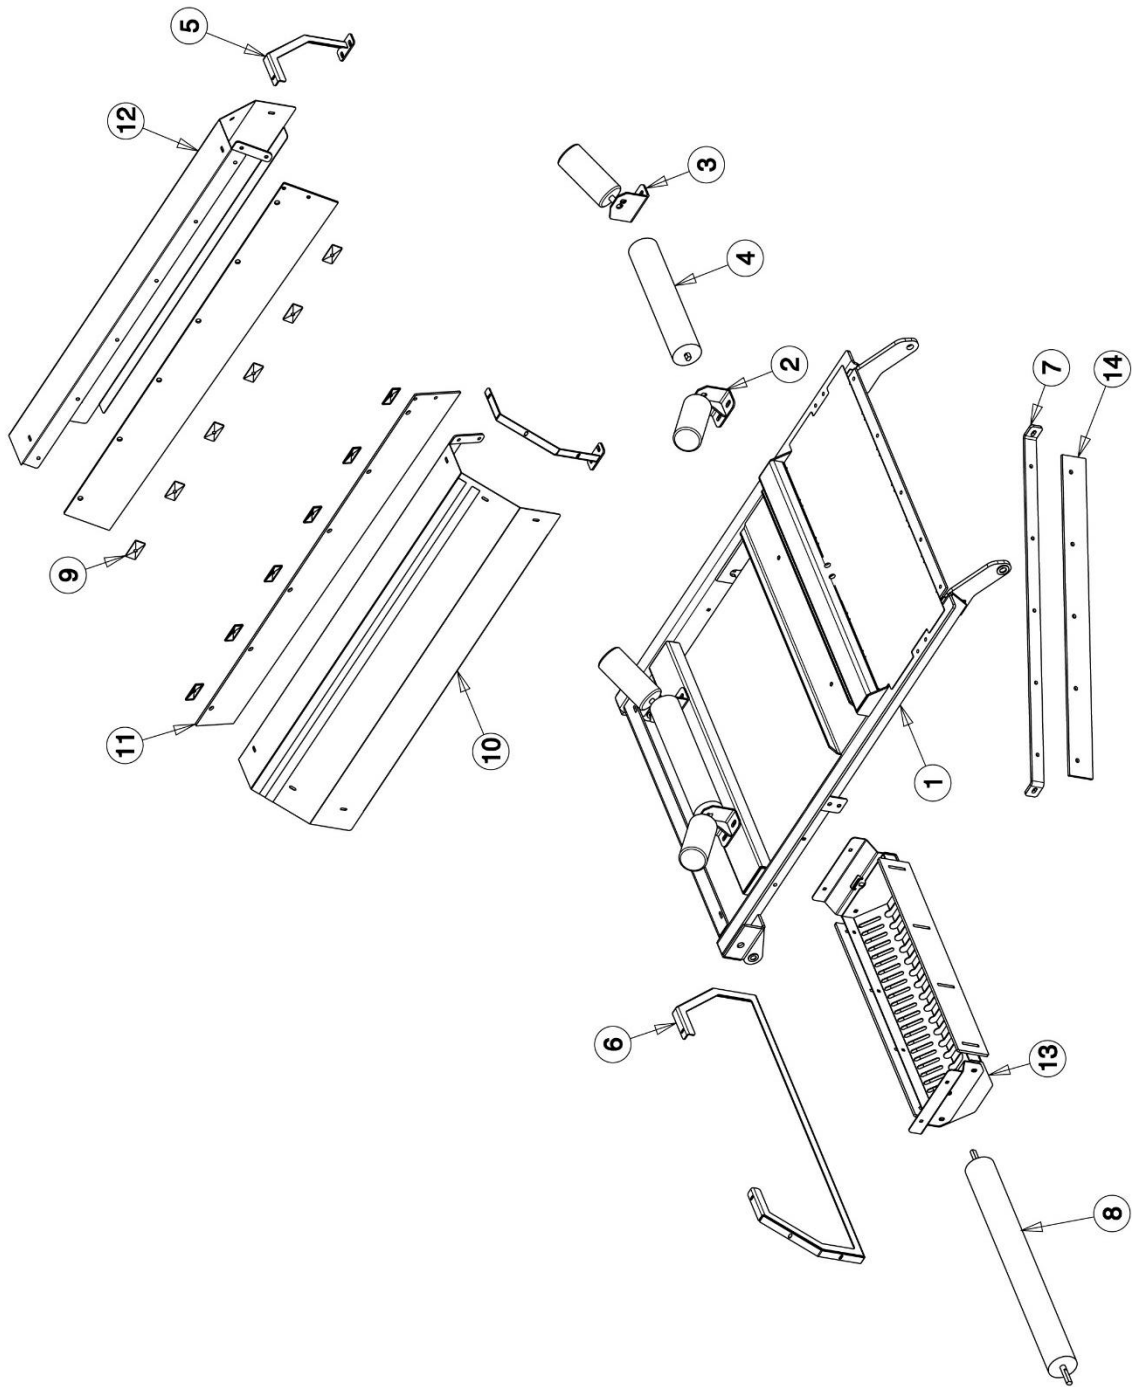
DRIVE DRUM ASSEMBLY
